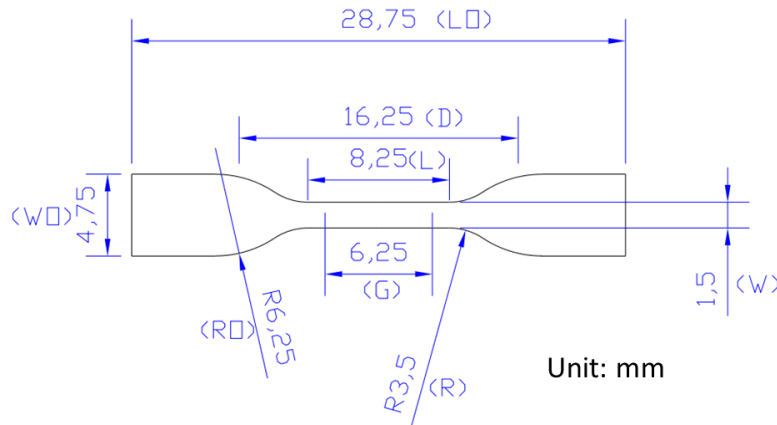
The dimensions of the dumbbell shape samples for tensile tests.
